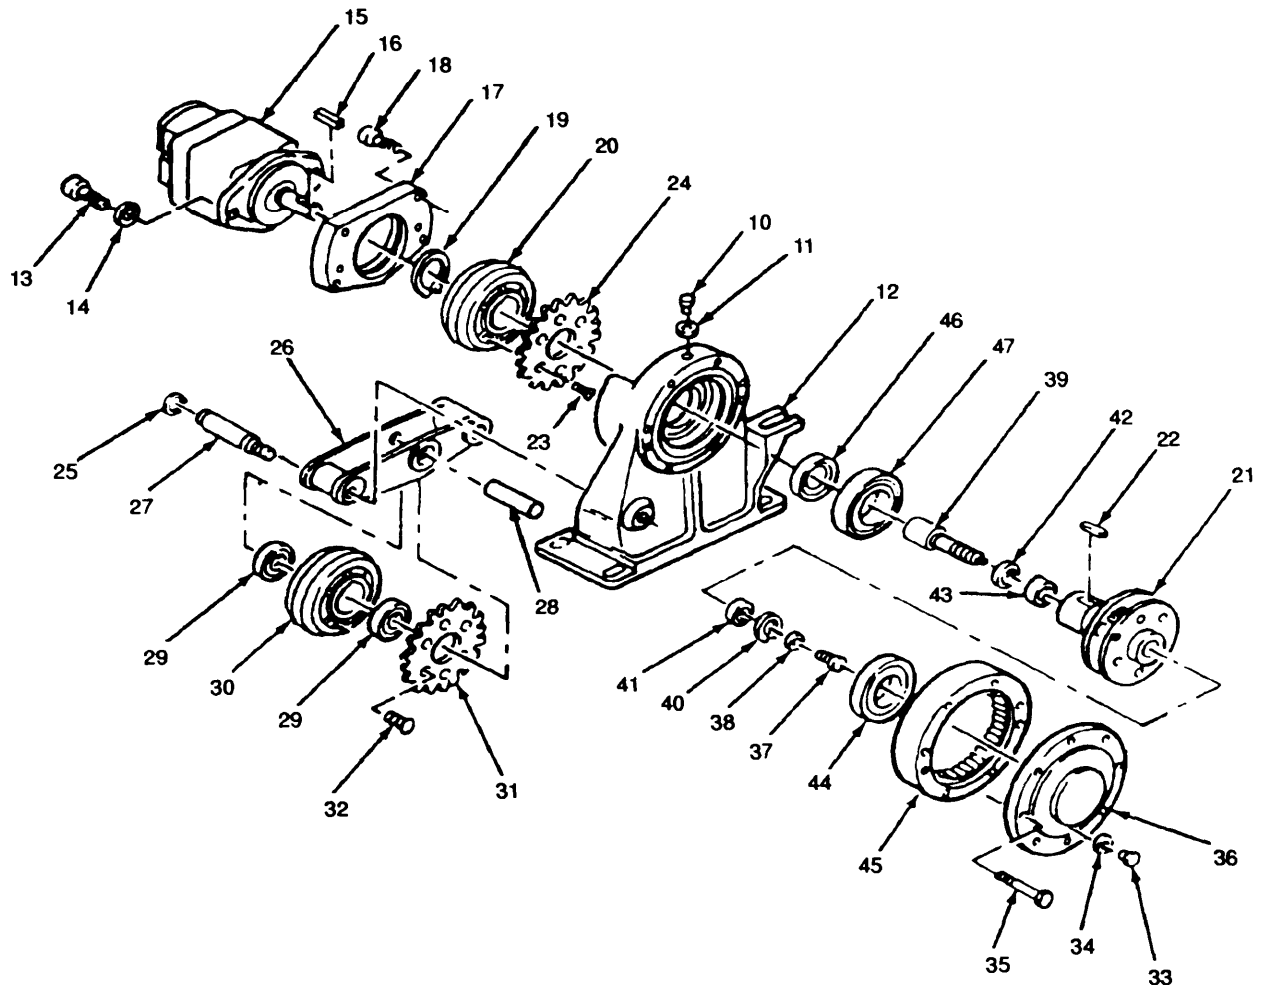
Cable Tensioner Assembly Repair (Sheet 2 of 4).
